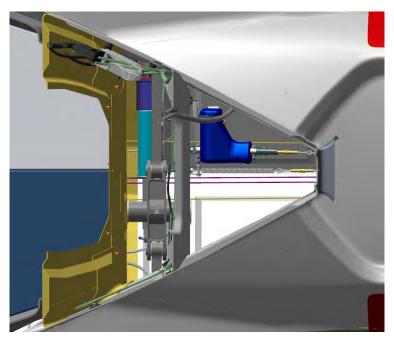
ELEVATOR CABLE TENSION CHECK LOCATION. VIEW IS LOOKING DOWN WITHIN THE ACCESS HOLE.
